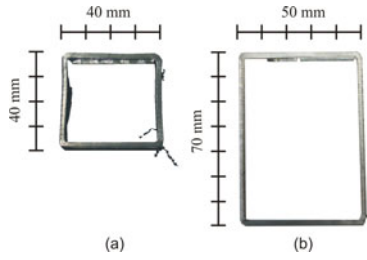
Profiles of cut workpieces. Material of the tested profiles is easy-to-cut mild construction steel.
